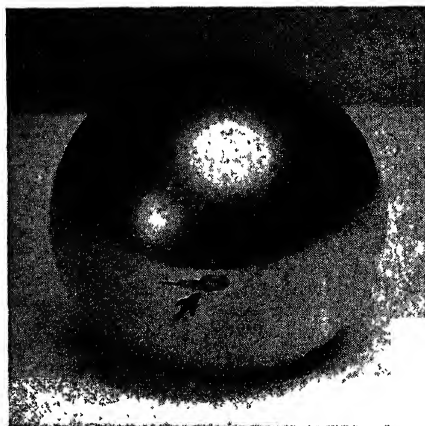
Pitted ball from a ball bearing. (*Motor Boating.*)
